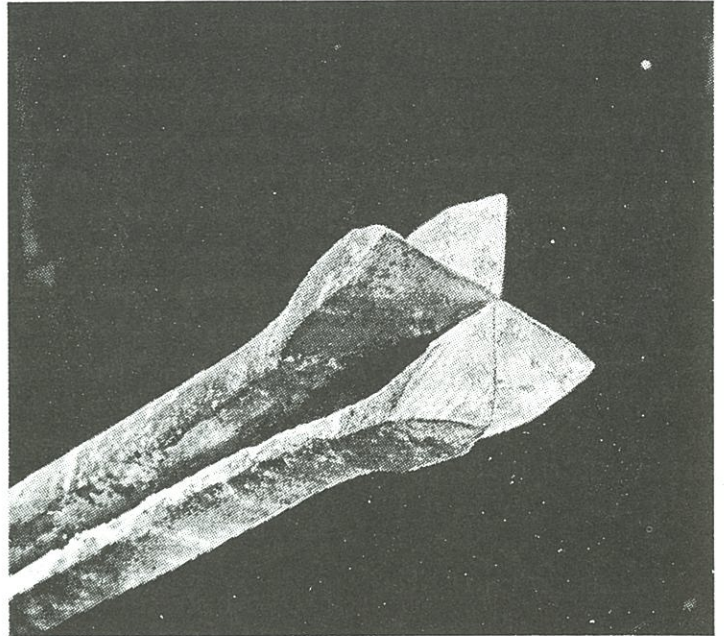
Steel for early pneumatic drill. "Star" or "X" bit, (2 1/16 in. cutting edge) forged from 1 3/8 in. "cruciform" steel stock. (cir. 1900)
